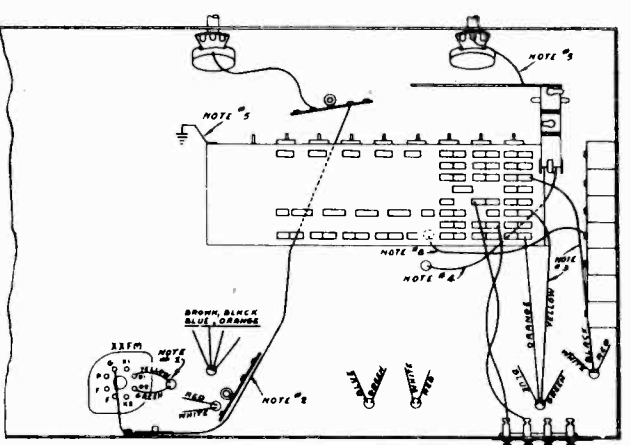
CRITICAL WIRING LOCATIONS, F. M. ALIGNING
